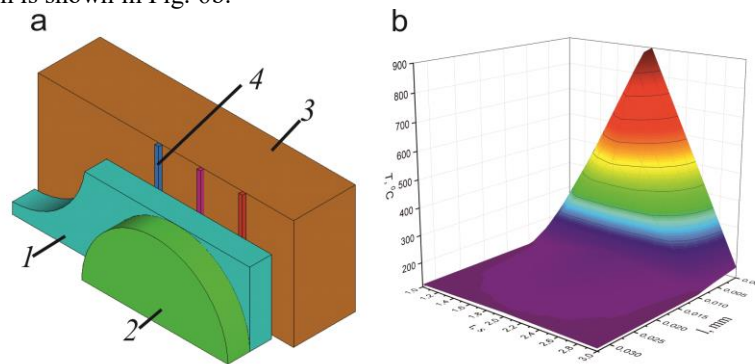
(a) Model of a fixed corset specimen (1 – specimen; 2 - bolts for specimen fixing; 3 – dies; 4 – rib of dies); (b) temperature distribution for the corset specimen.
